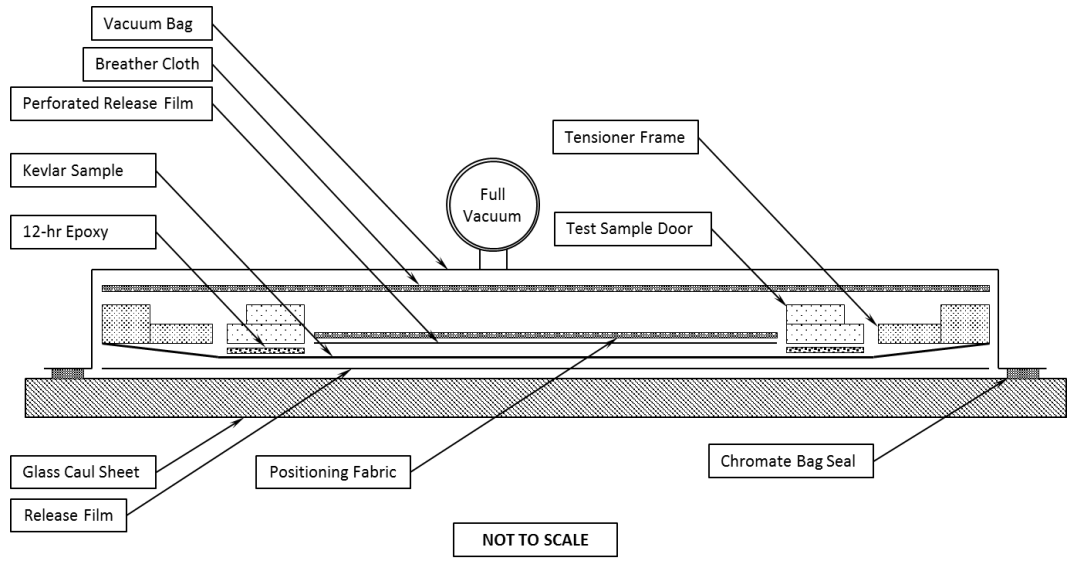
Layup template for bonding tensioned Kevlar® sample specimen door panel assembly using general purpose epoxy cured under 22 in-HG of vacuum at room temperature
